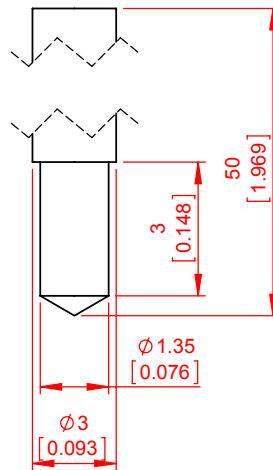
The drill required for making the hole for the C-Grid in the hearing instrument shell.
